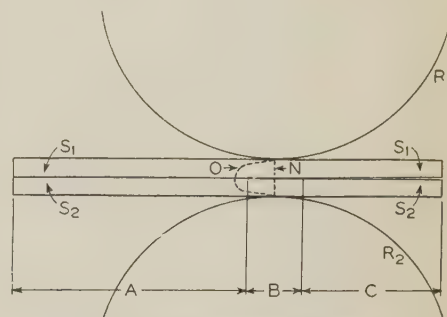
Diagram illustrating welding of low resistance sheets by roller electrodes
